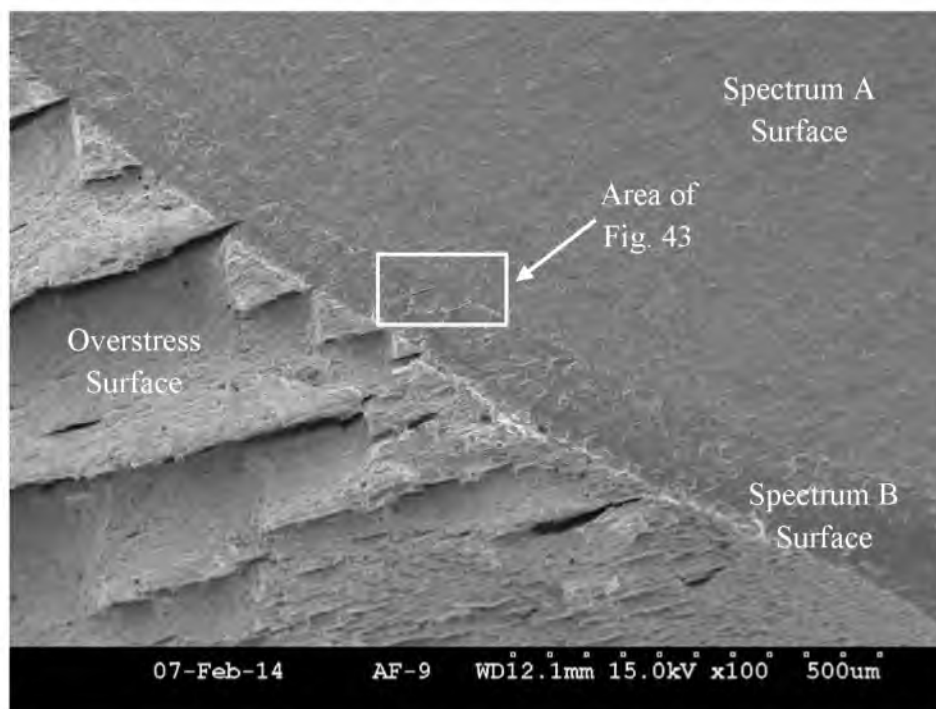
Wide View of Cracks in Spectrum B Fracture Surface
